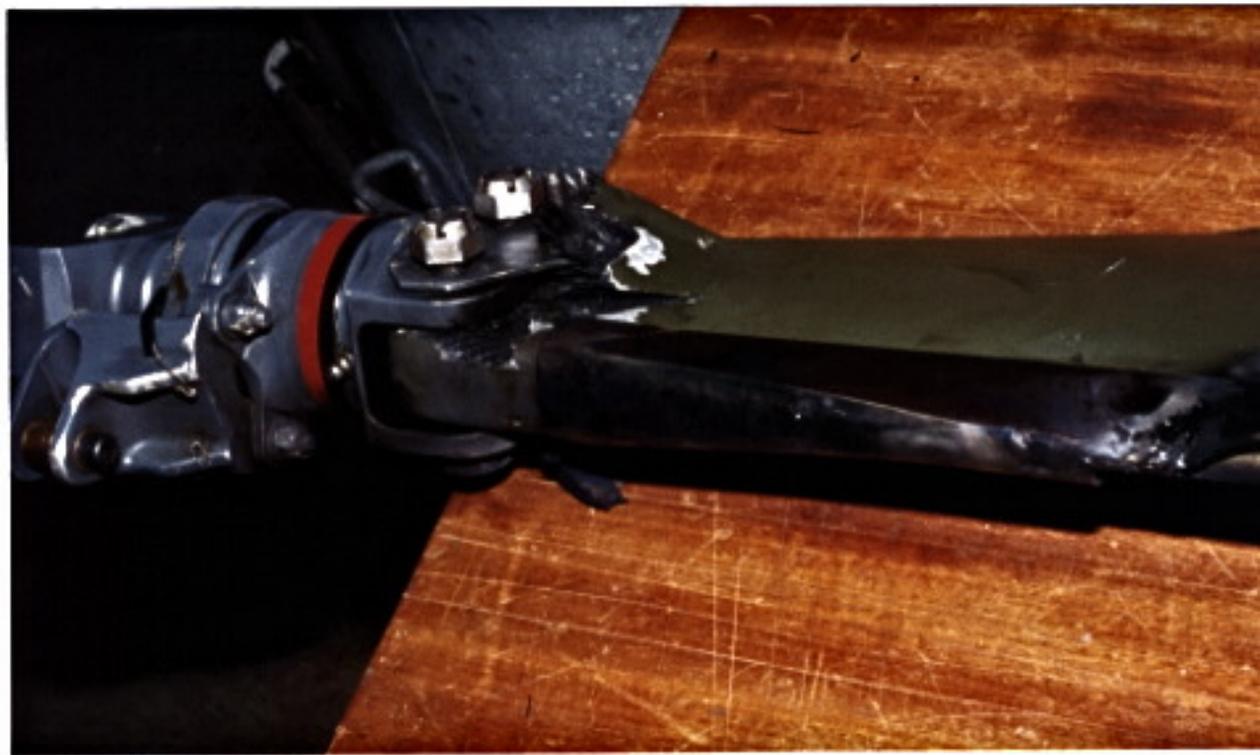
D: Showing very marked carbon fibre disbonding and delamination adjacent attachment bolts on inboard side of above blade.
